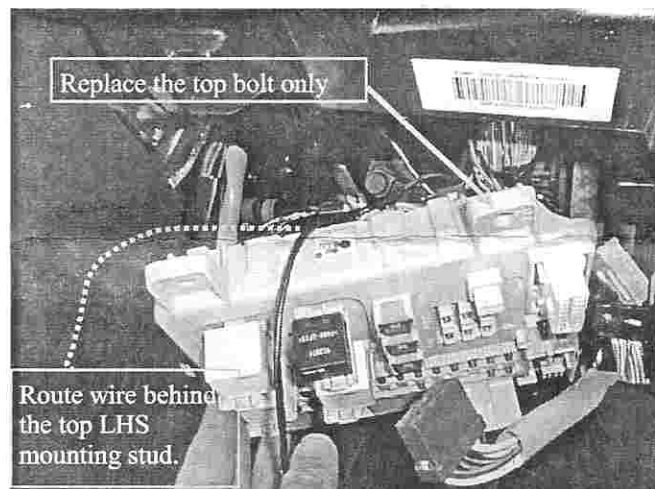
Replace the fuse panel with the top RHS M6 bolt only. Route wiring loom behind fuse panel
